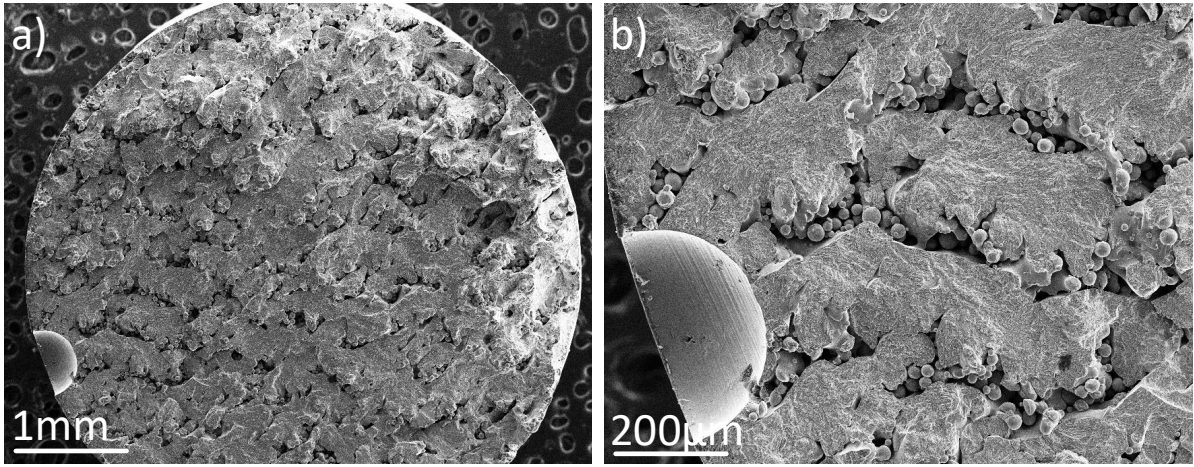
Fracture surface of sample D32-8 showing a layer delamination.
